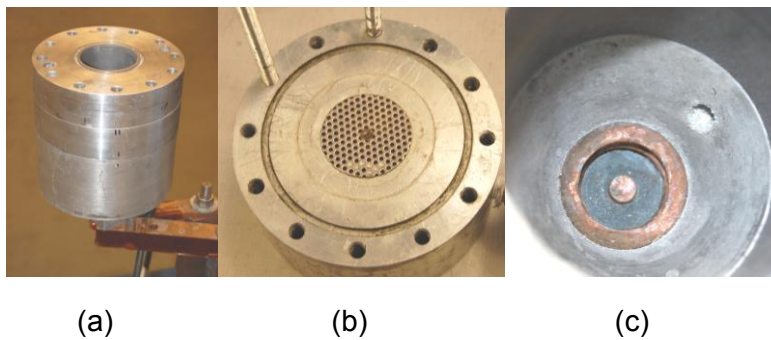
The electro hydraulic test system , a) without target section, b) target section, c) coaxial electrode
